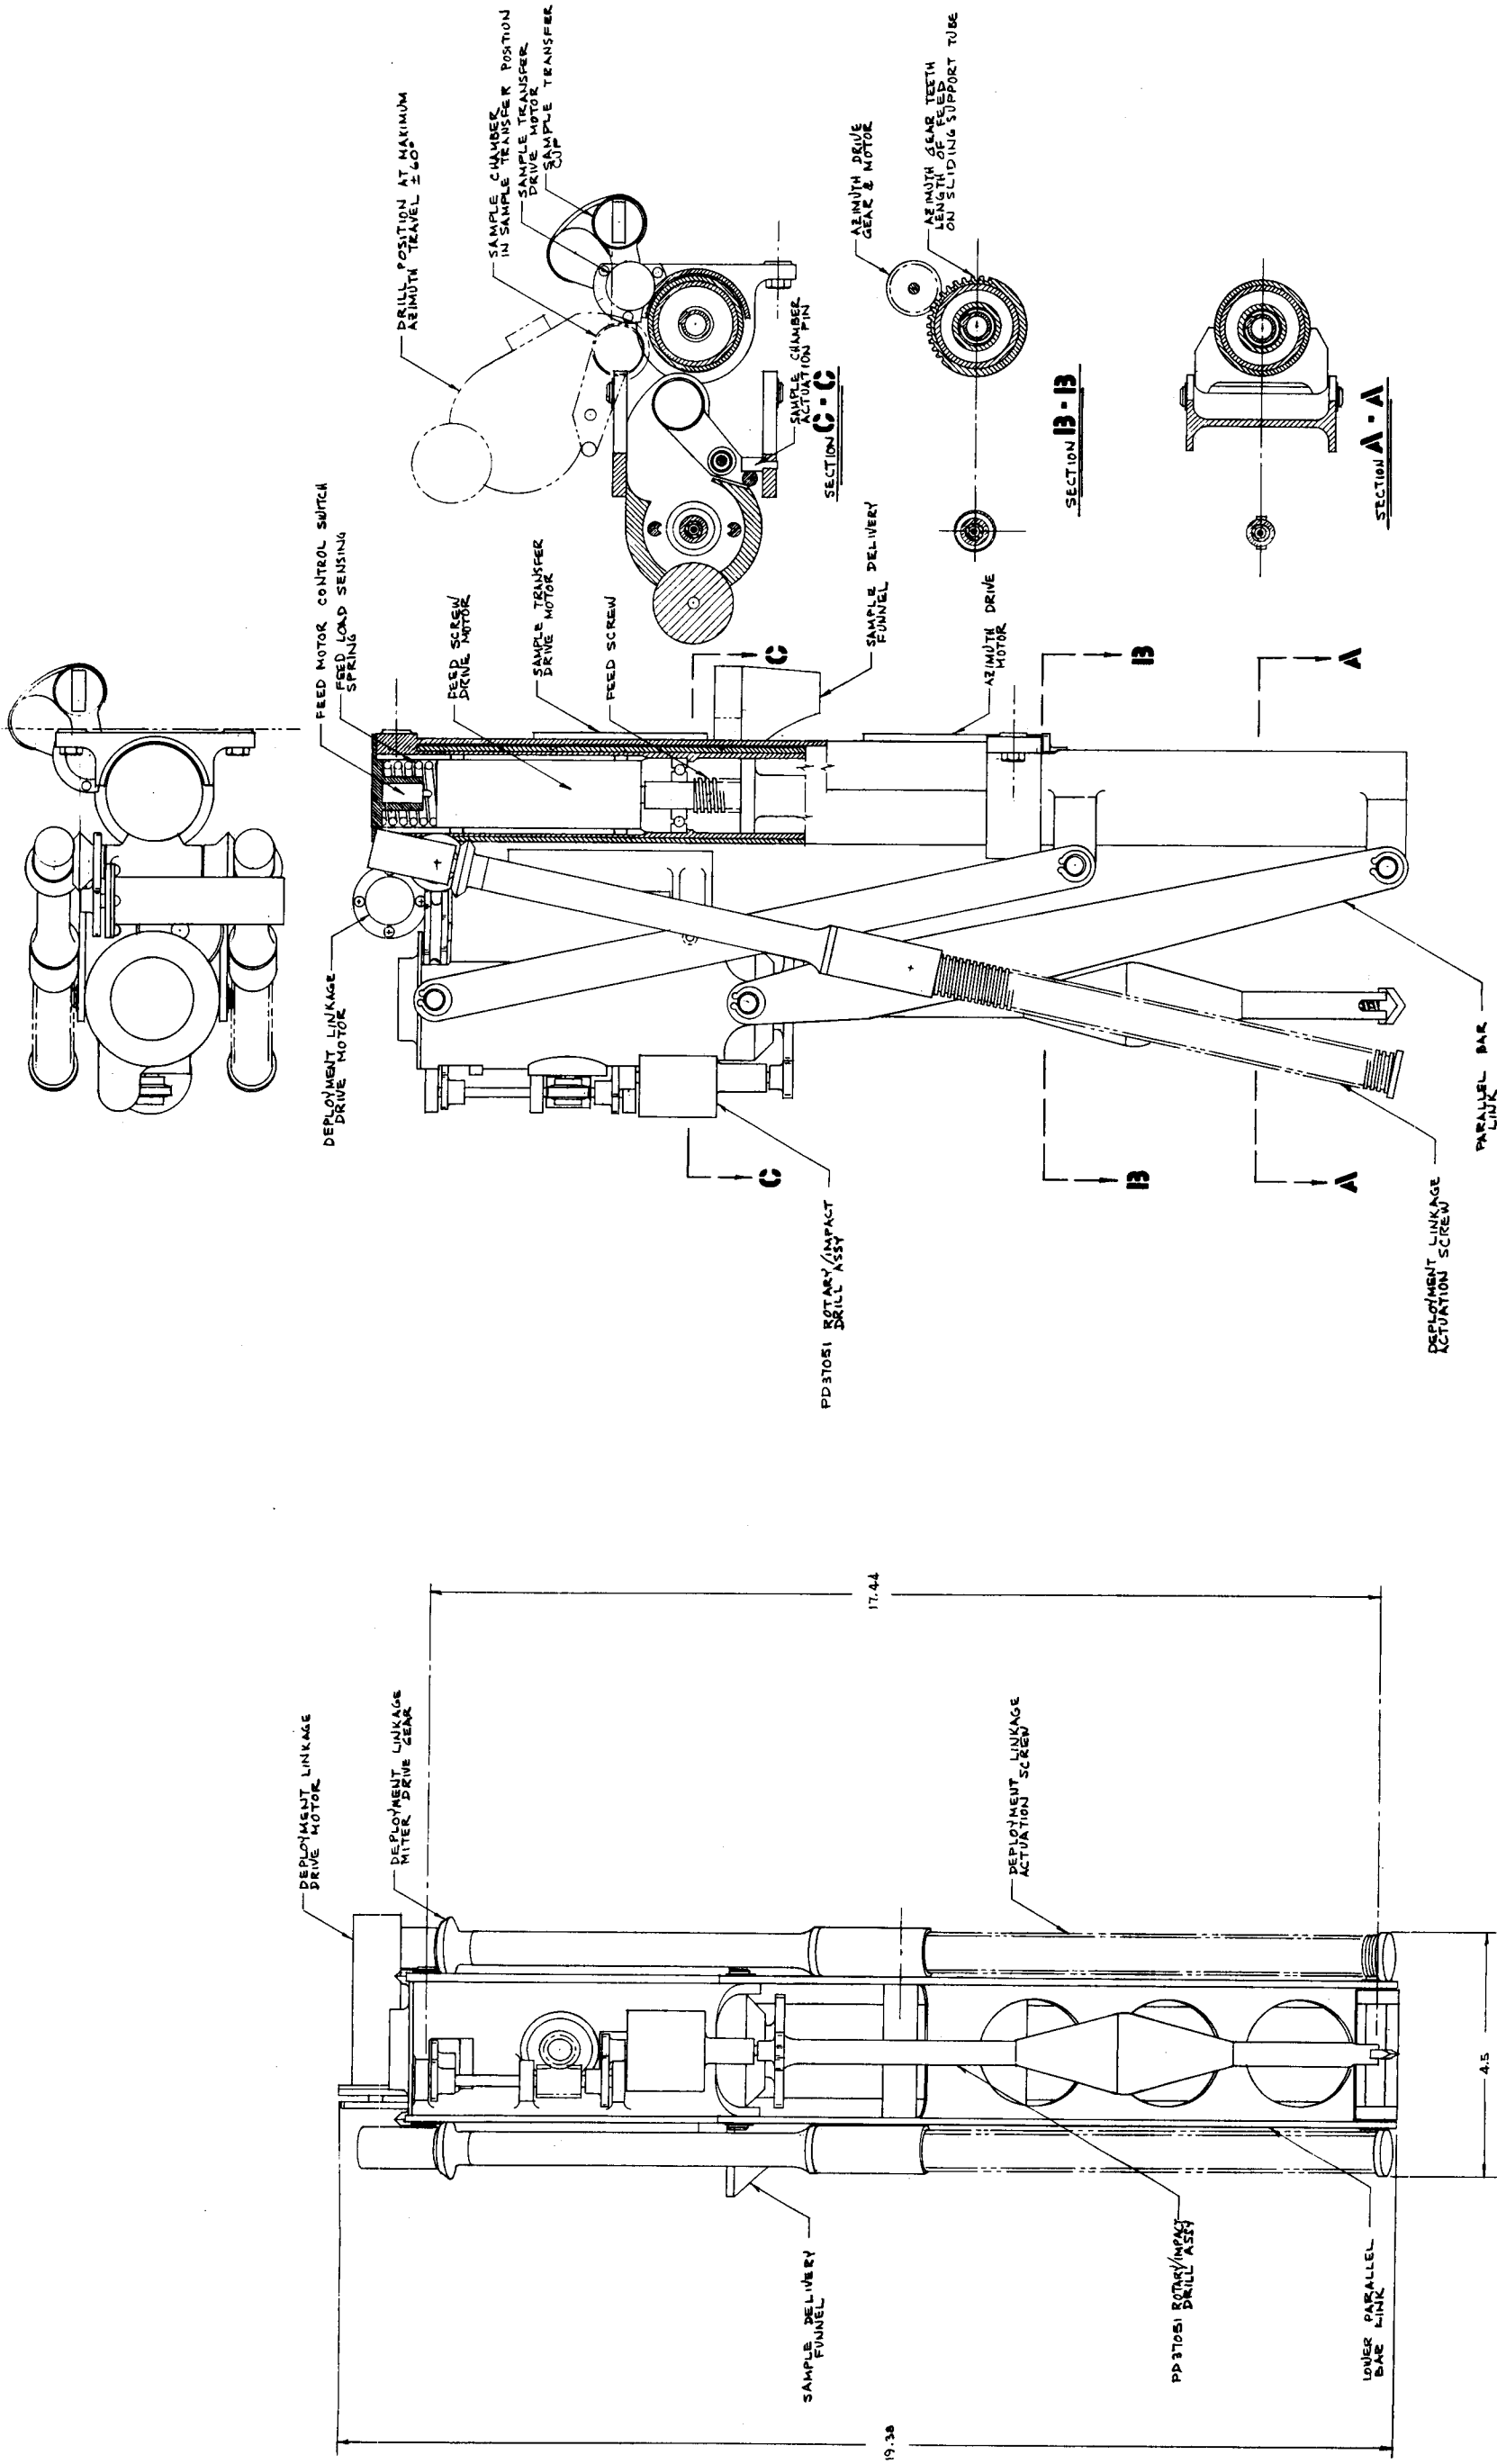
ROTARY/IMPACT DRILL AND DEPLOYMENT ASSEMBLY
